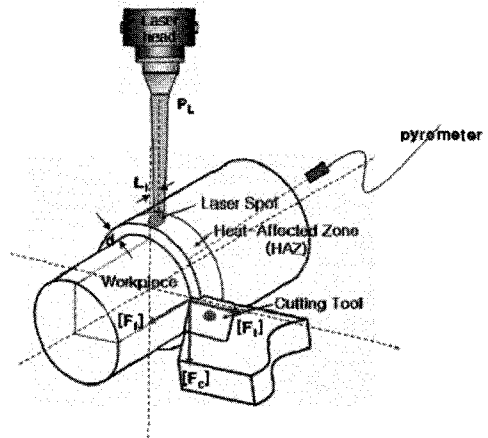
Sketch of the laser-assisted machining of a cylindrical workpiece
